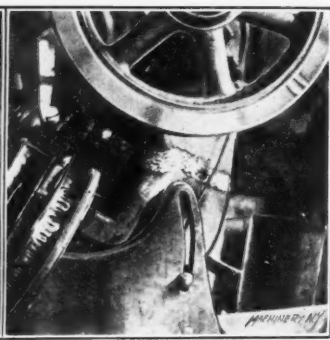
Welded Cast Iron Power Press Frame.
